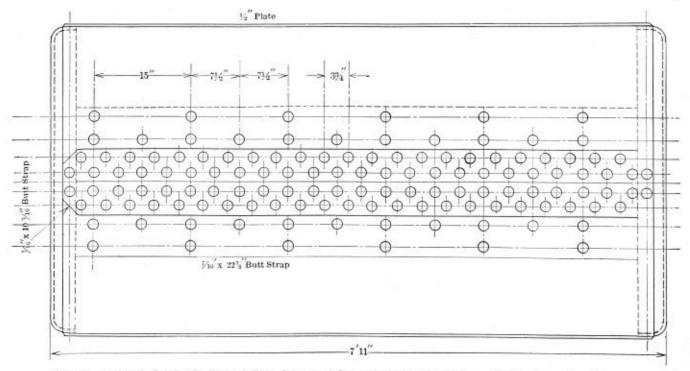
Standard Quadruple Riveted Butt Joint as Advocated by Hartford Steam Boiler Inspection Company
